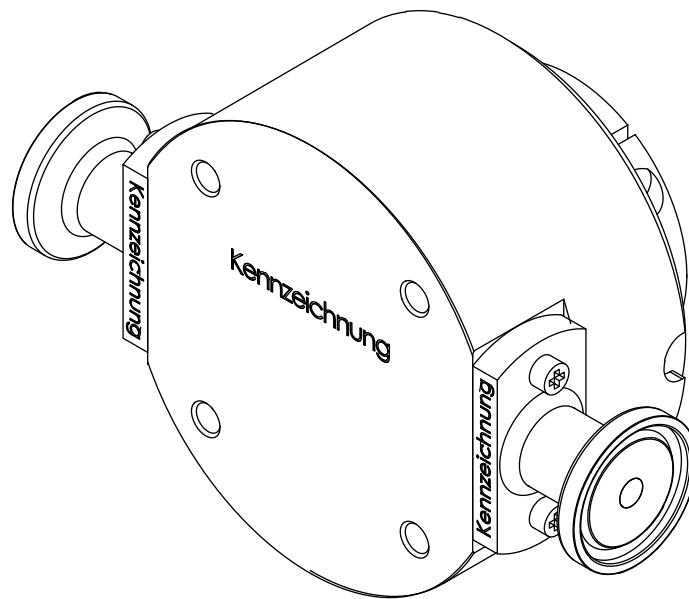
Sub-assembly pump chamber QF15DISPP-3
